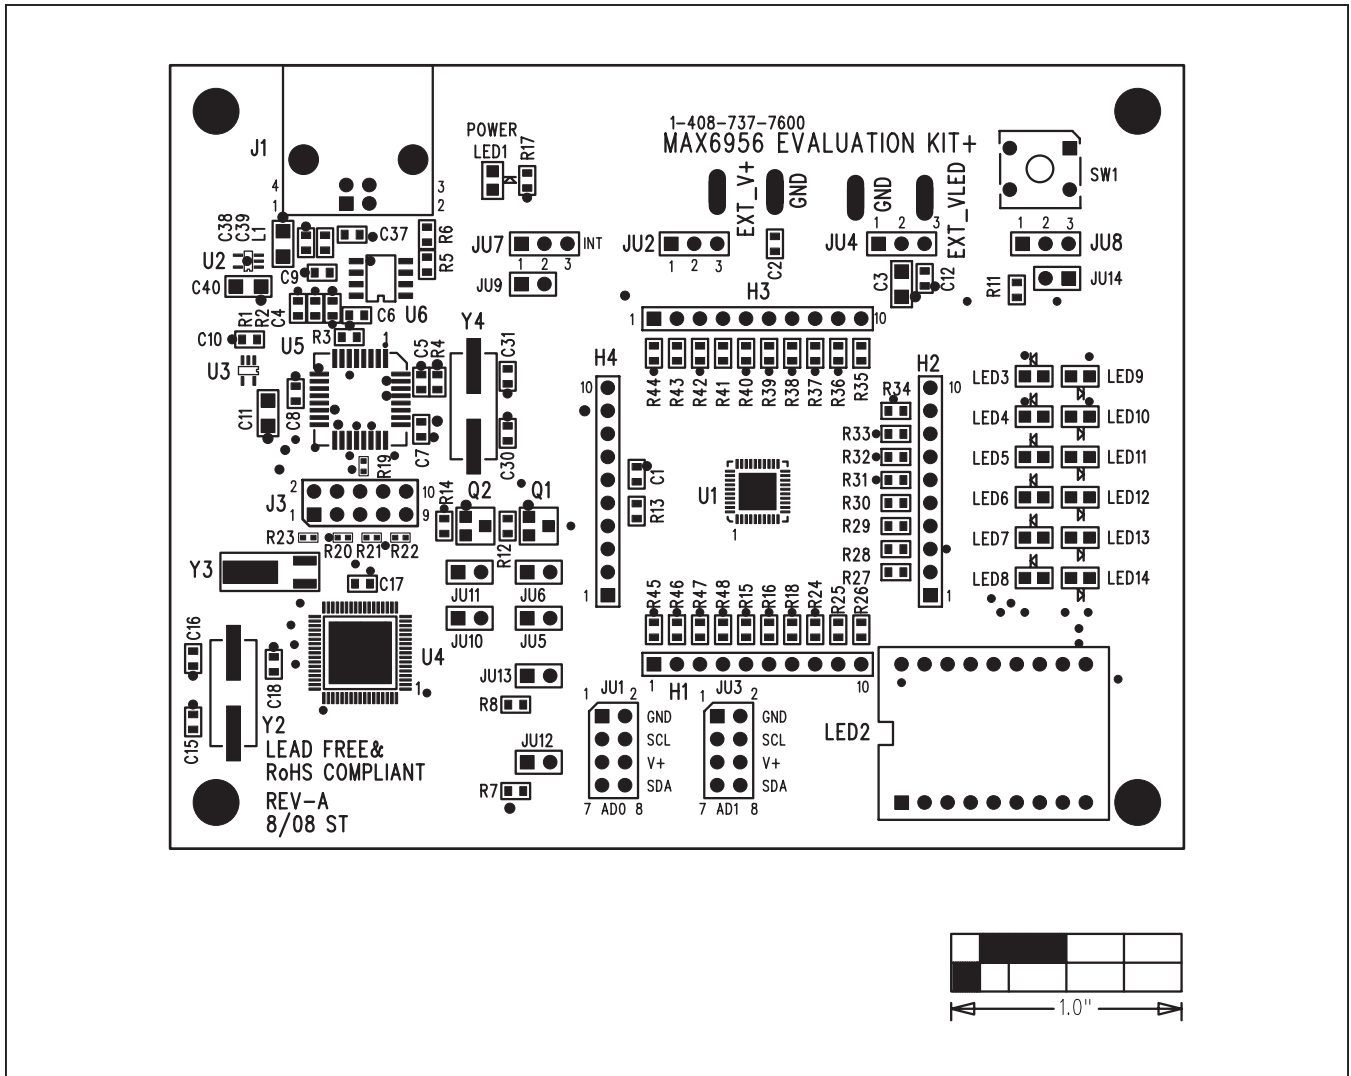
MAX6956 EV Kit Component Placement Guide—Component Side
